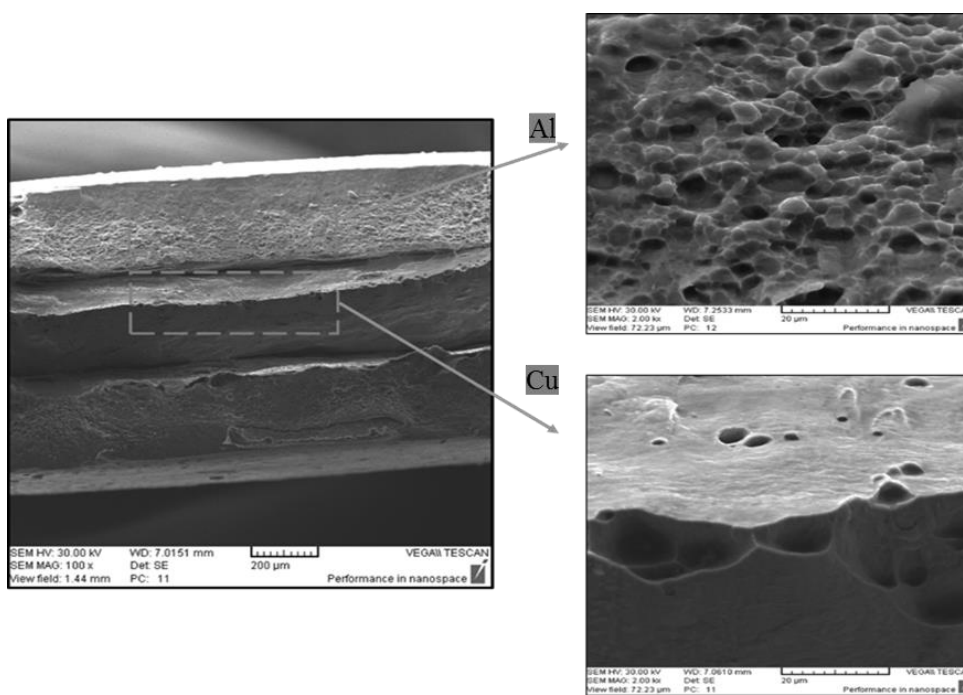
Tensile fracture surfaces of Al/Cu composite produced by CRB process
